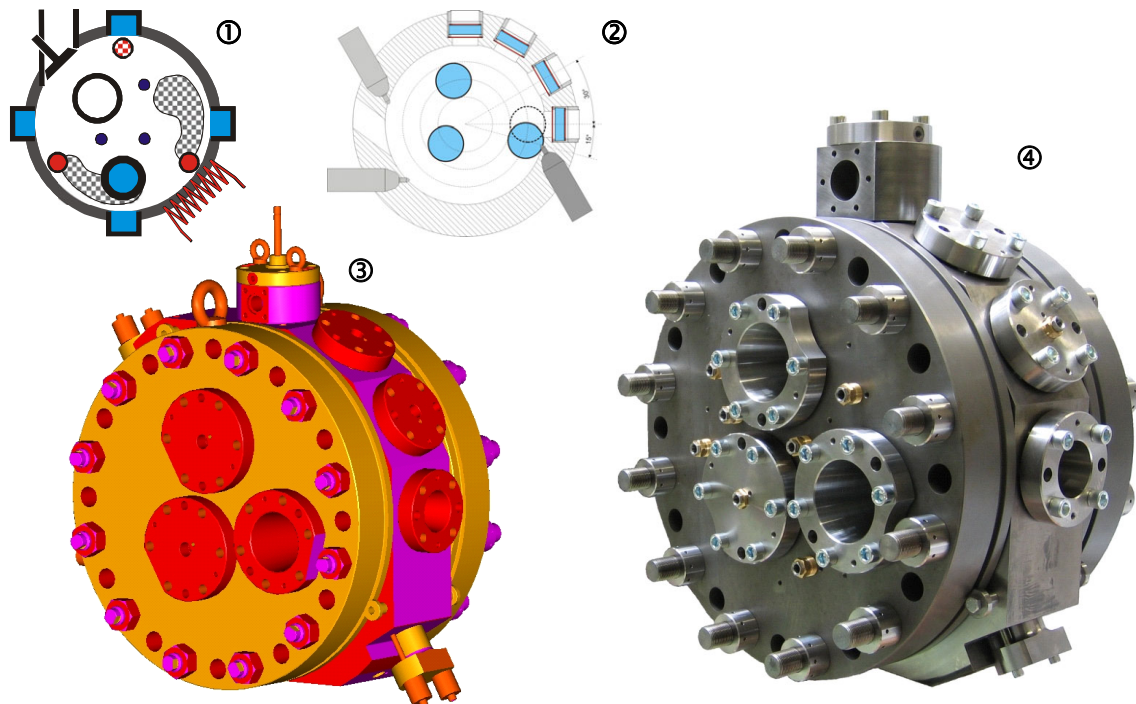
Progress of the spray/combustion chamber development: (1) sketch kick-off meeting, (2) drawn to scale draft, (3) 3-D CAD outline and (4) finally assembled spray/combustion chamber.
